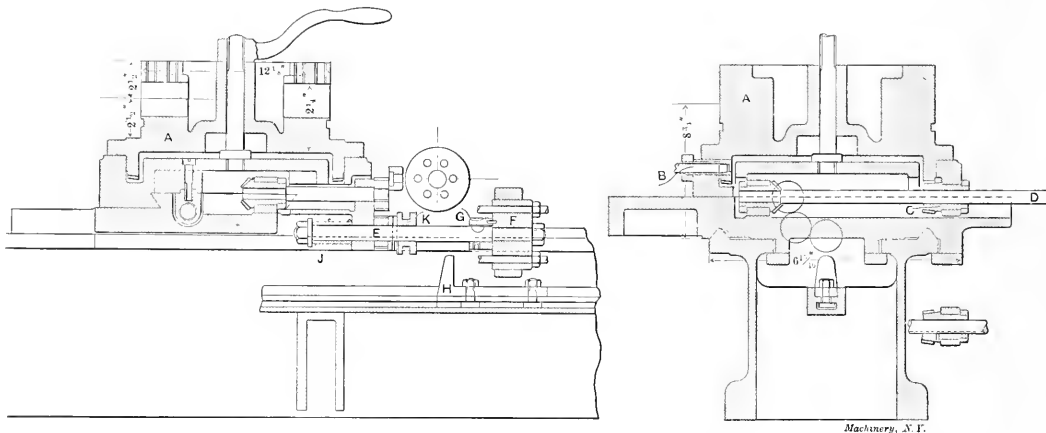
Construction of Turret, Prentice High-speed Lathe.
